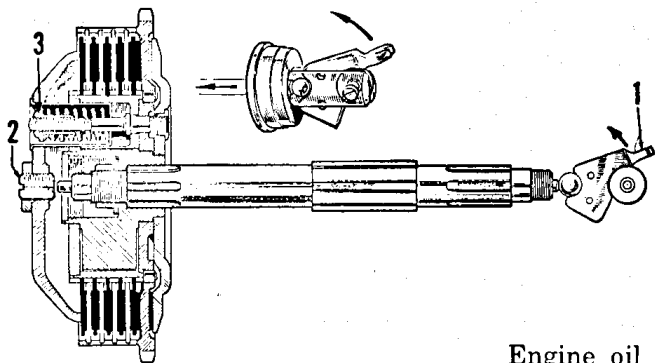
Cross sectional view of the transmission input shaft and clutch assembly.
